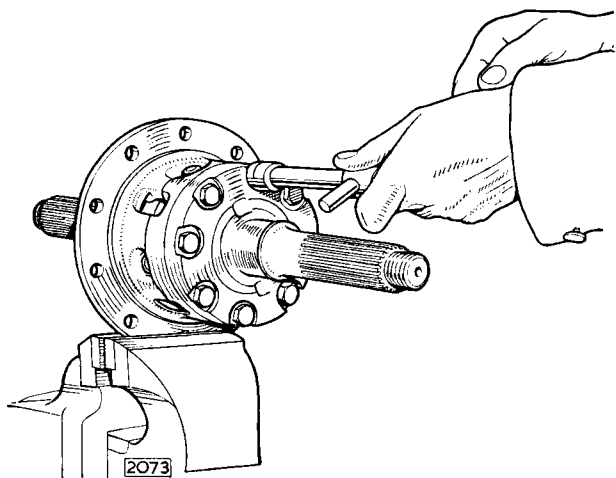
Tightening the differential casing bolts with the output shaft in position
